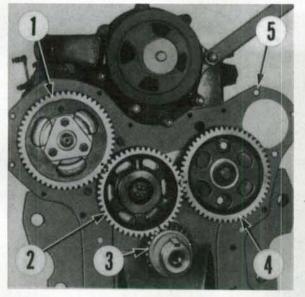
Timing gears are properly timed when timing marks are aligned as shown on crankshaft gear, idler gear, camshaft gear and injection pump gear.
